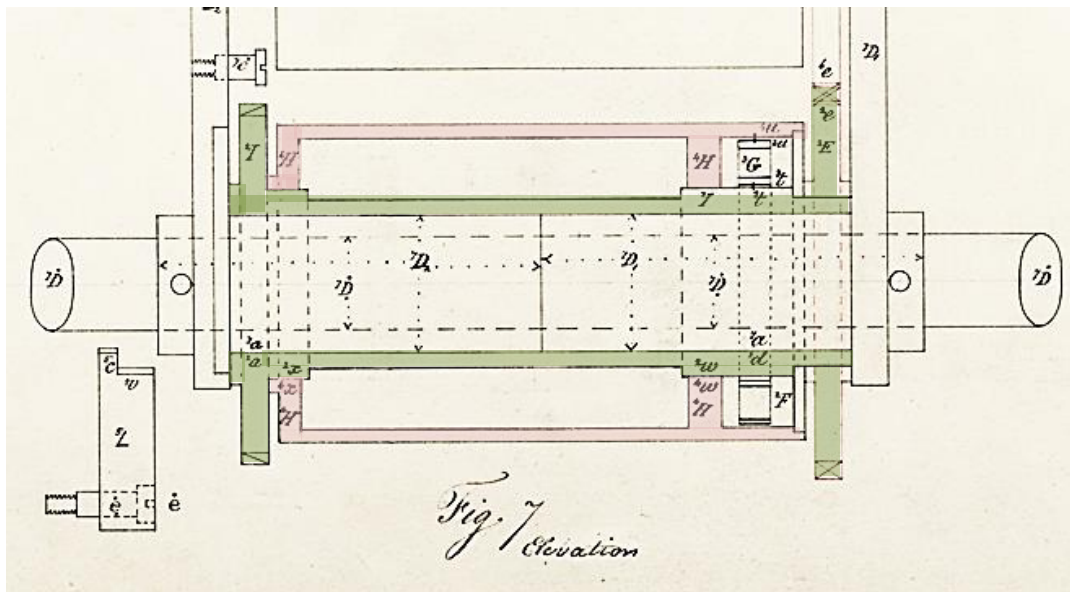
Paper take-up drum assembly (A/165) (colour added).
